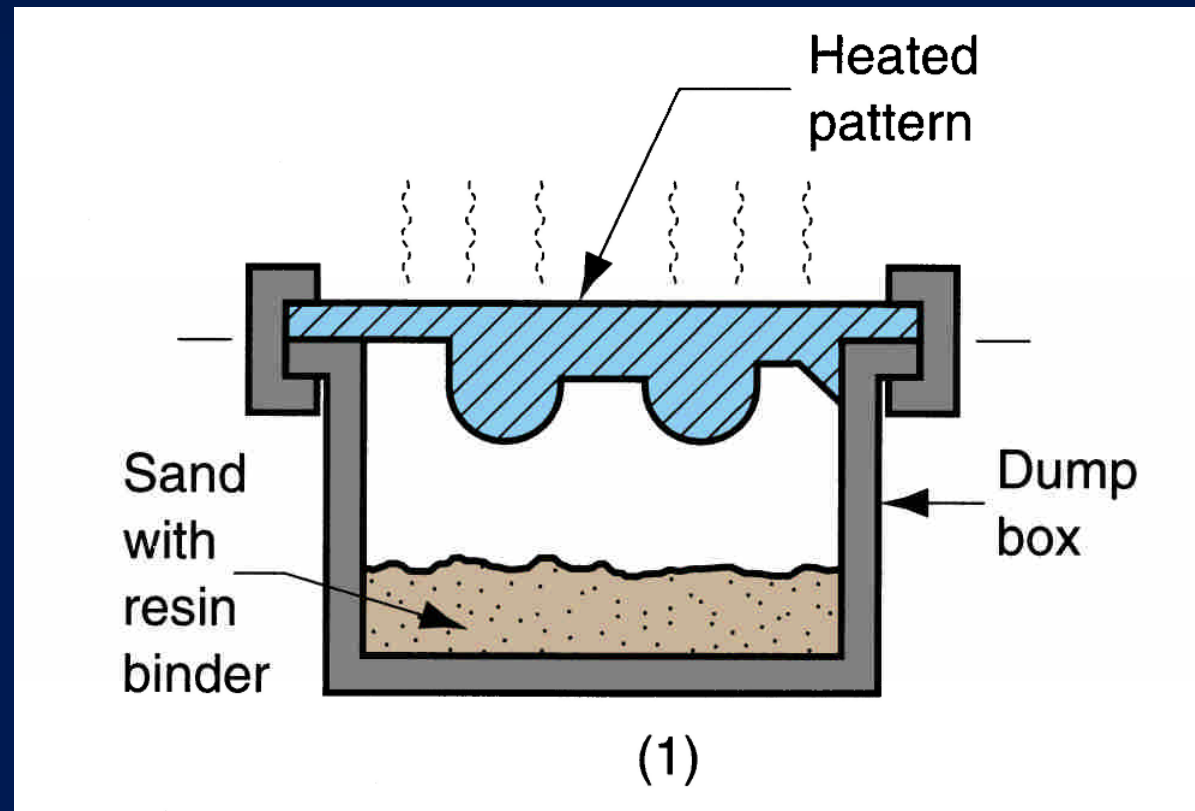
Steps in shell-molding: (1) a match-plate or cope-and-drag metal pattern is heated and placed over a box containing sand mixed with thermosetting resin
